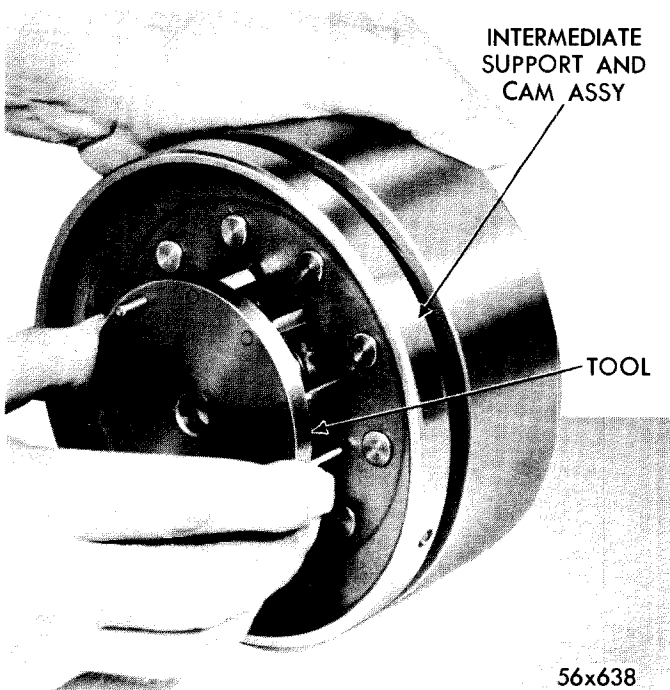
Installation of Tool C-3527 in Intermediate Support and Cam Assembly
